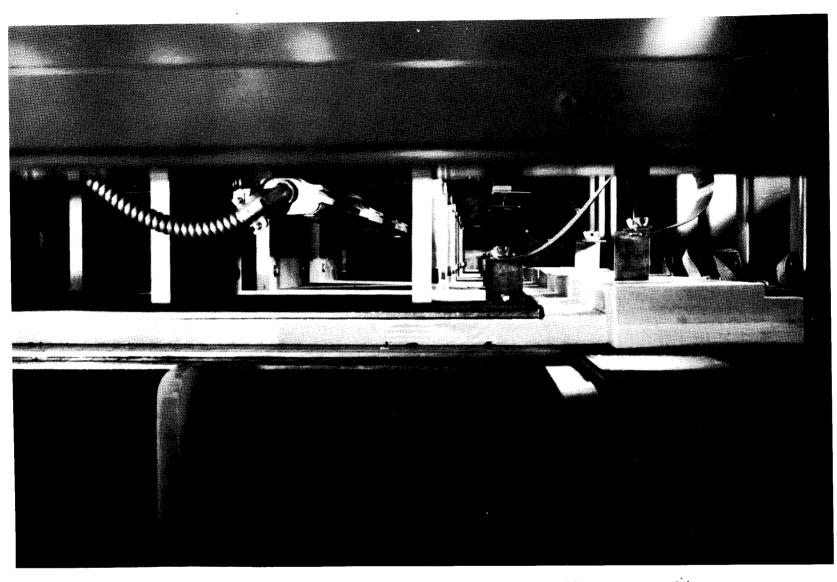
End view of the interior of an edge bonding press. This press provides both vertical and horizontal pressure to the boards under the closed platen. Photo courtesy of Mann-Russell Electronics, Inc.
